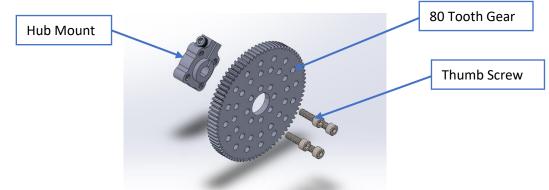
80 Tooth gear assembly. A combination of a hub mount, a large gear, and thumb screws
